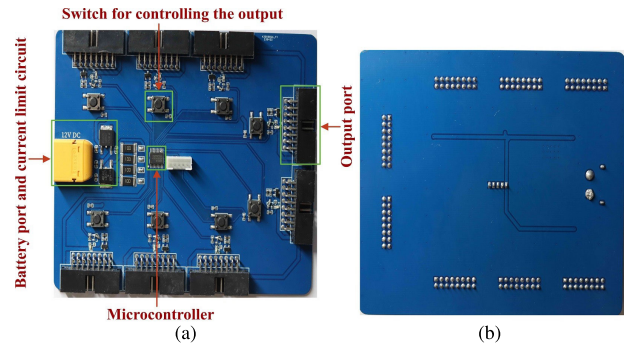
Fabricated prototype of the control circuit board (a) Top view and (b) Bottom view.
